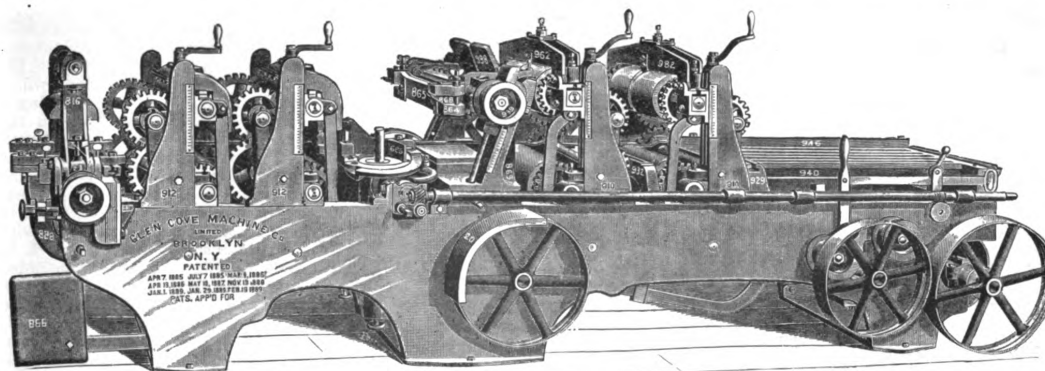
Combined Double Surfer and Matcher, Made by the Glen Cove Machine Co., Limited, Brooklyn, N. Y.
